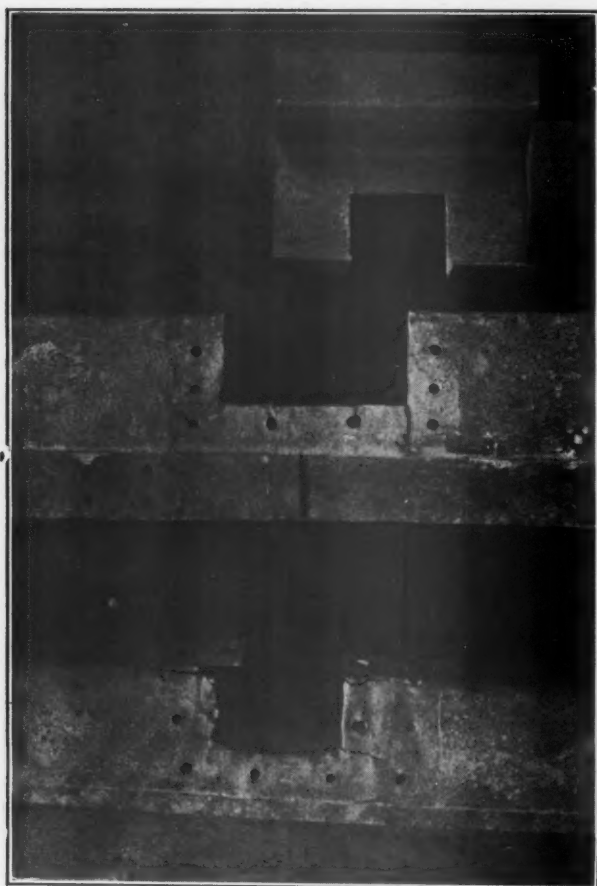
DAMAGED END SILLS AFTER BEING STRAIGHTENED; ALSO THE REINFORCING PIECE FOR THE CENTER.
